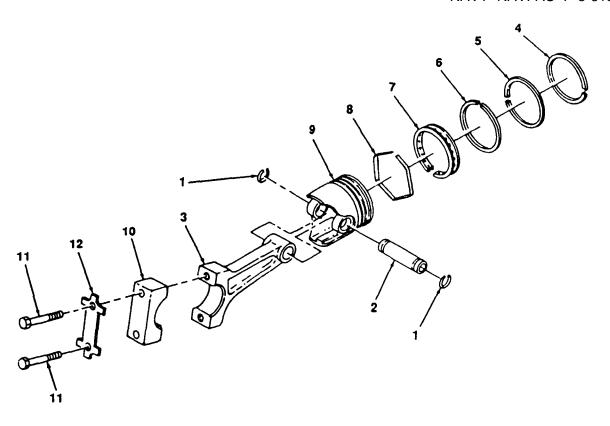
Piston and Connecting Rod Assembly, Repair.
